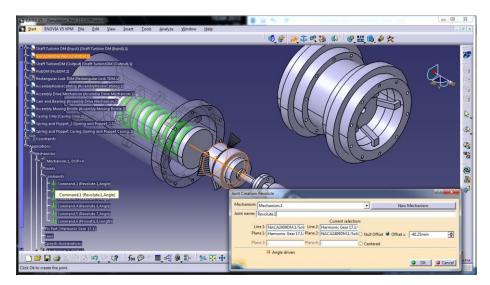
Revolve joint for Harmonic gear and Turbine blade.
